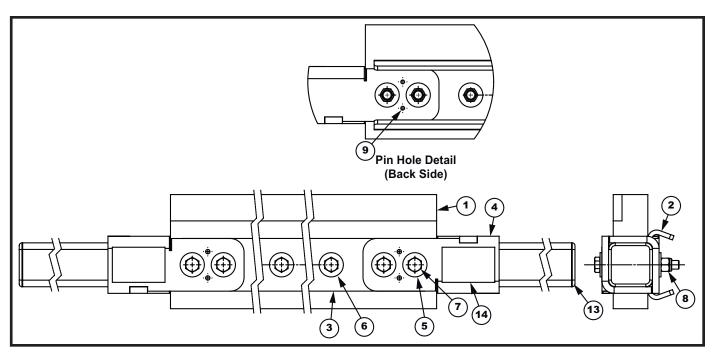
Martin® UBX Secondary Cleaner Assembly, P/N UBMSXXSXXXXX
